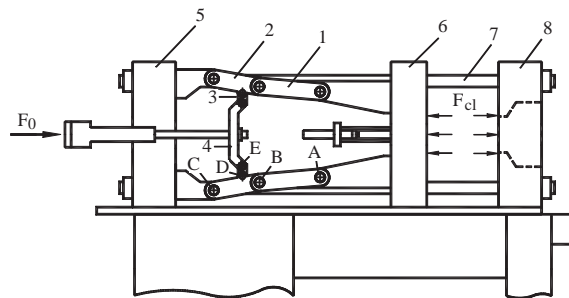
Five-point double-toggle clamping mechanism of the injection molding machine.
